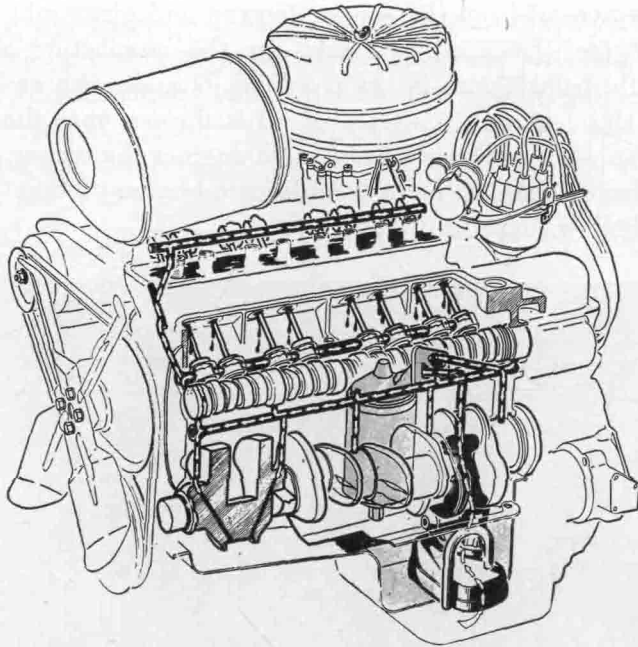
Full-pressure lubrication system used on a V-8 overhead-valve engine. (Buick Division of General Motors Corporation)
